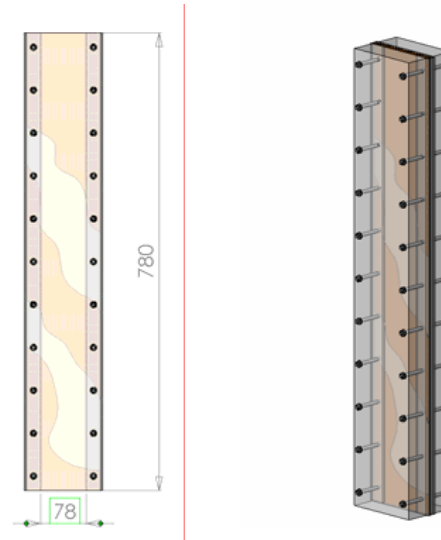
Front and isometric view of the flat plate fuel-assembly-model, dimensions are in millimetres.
